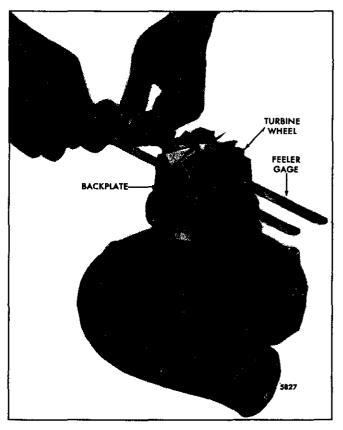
Checking Turbine Wheel to Backplate Clearance
